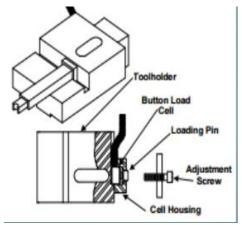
Strain gage or load cell mounting on rear of tool holder for increased accuracy [6]
